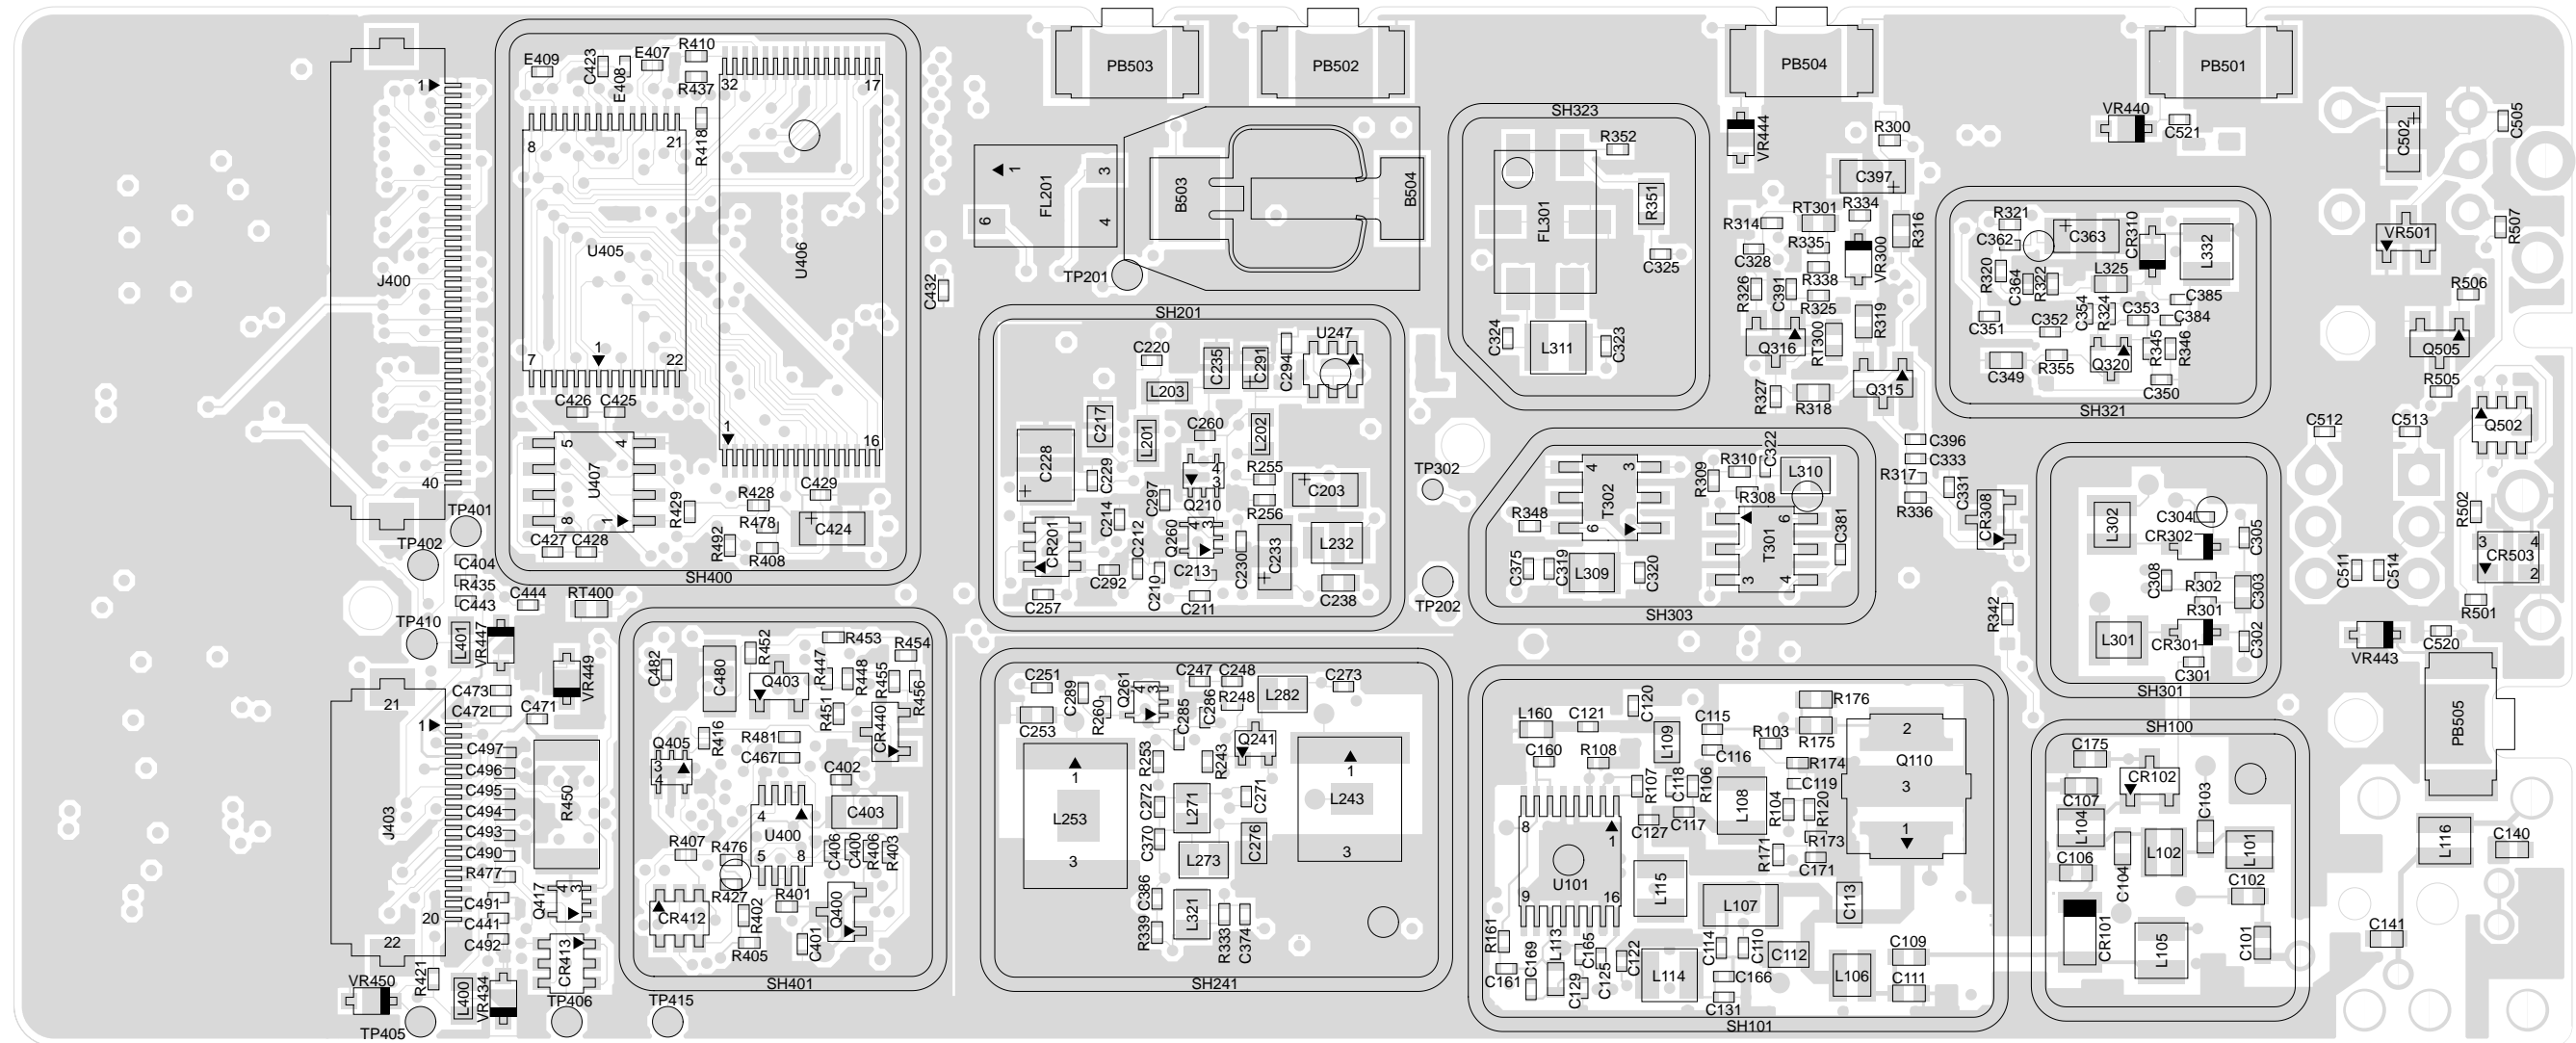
UHF (403-470 MHz) 5000/7000 Series Main Board Top Side PCB 8480587Z05
